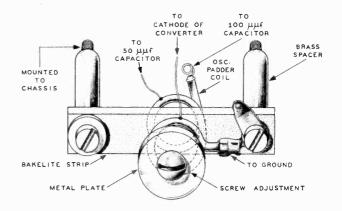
The construction of the oscillator padder used in the Pilotuner. The threaded portion of the screw adjustment was omitted from the drawing for greater clarity.
